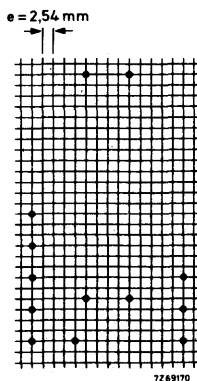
Hole pattern for mounting on a printed-wiring board (solder side).
